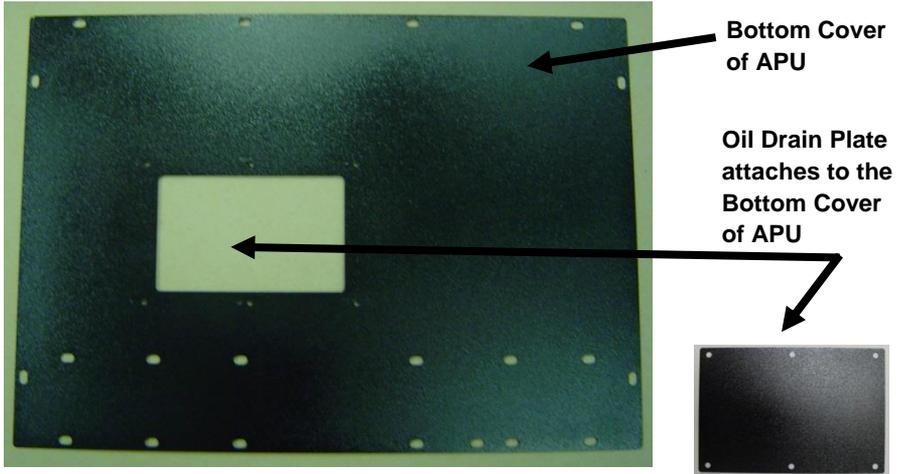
Bottom Cover of APU showing removable Oil Drain Plate
